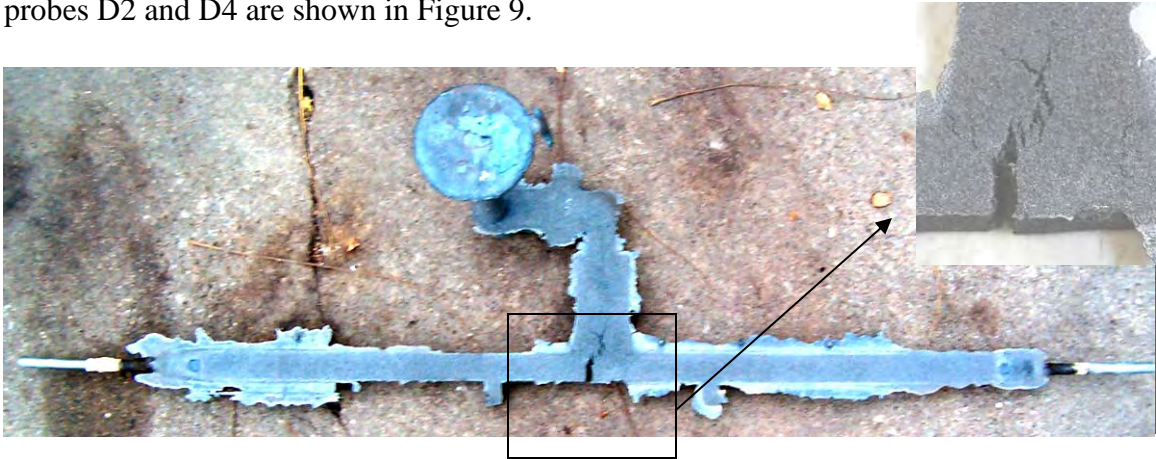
Final shape for Casting 5 with magnified view of crack in inset.
